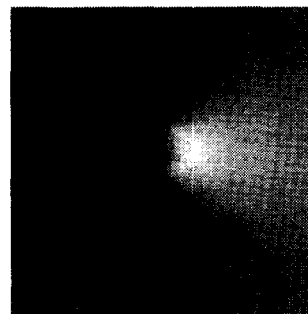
Heat affected zone analysis of welding by ESPI
